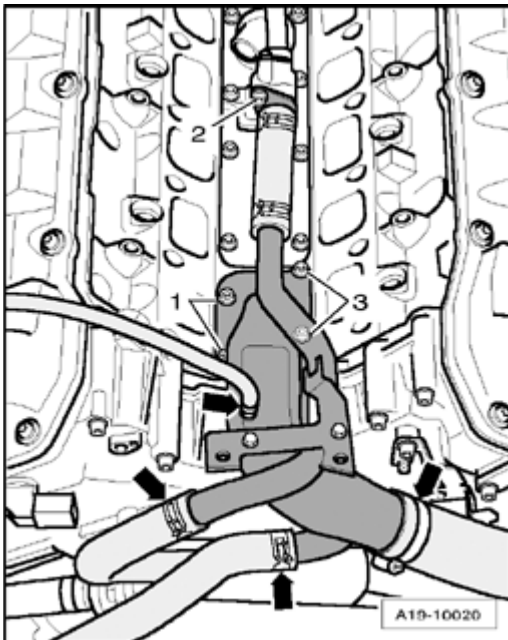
Coolant Hoses At Upper Coolant Pipe & Bolts
